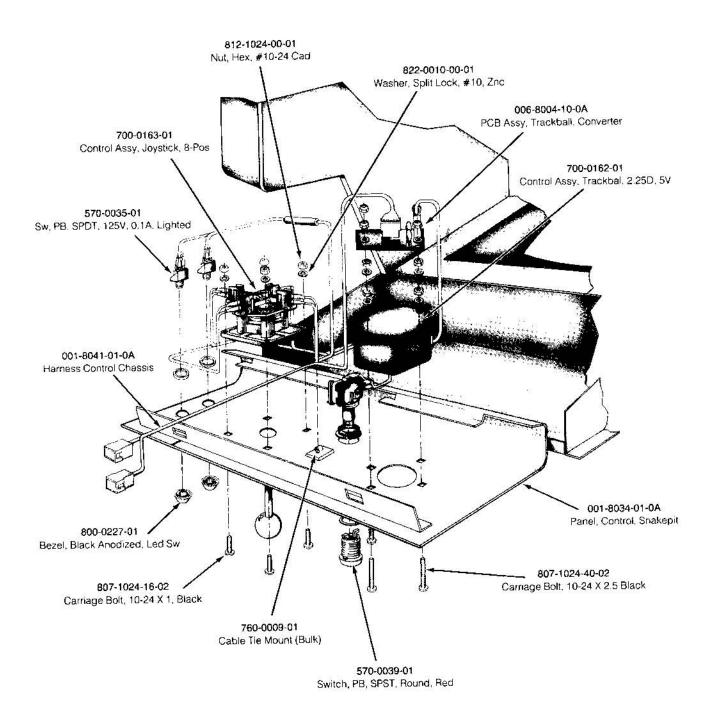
Control Panel Assembly, Snakepit (000-8002-10-0A)
